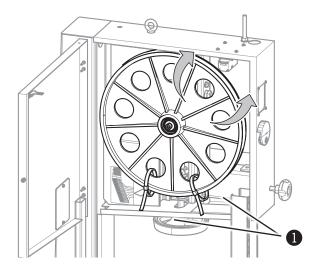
Replacing the rubber wearing surface of the upper wheel
